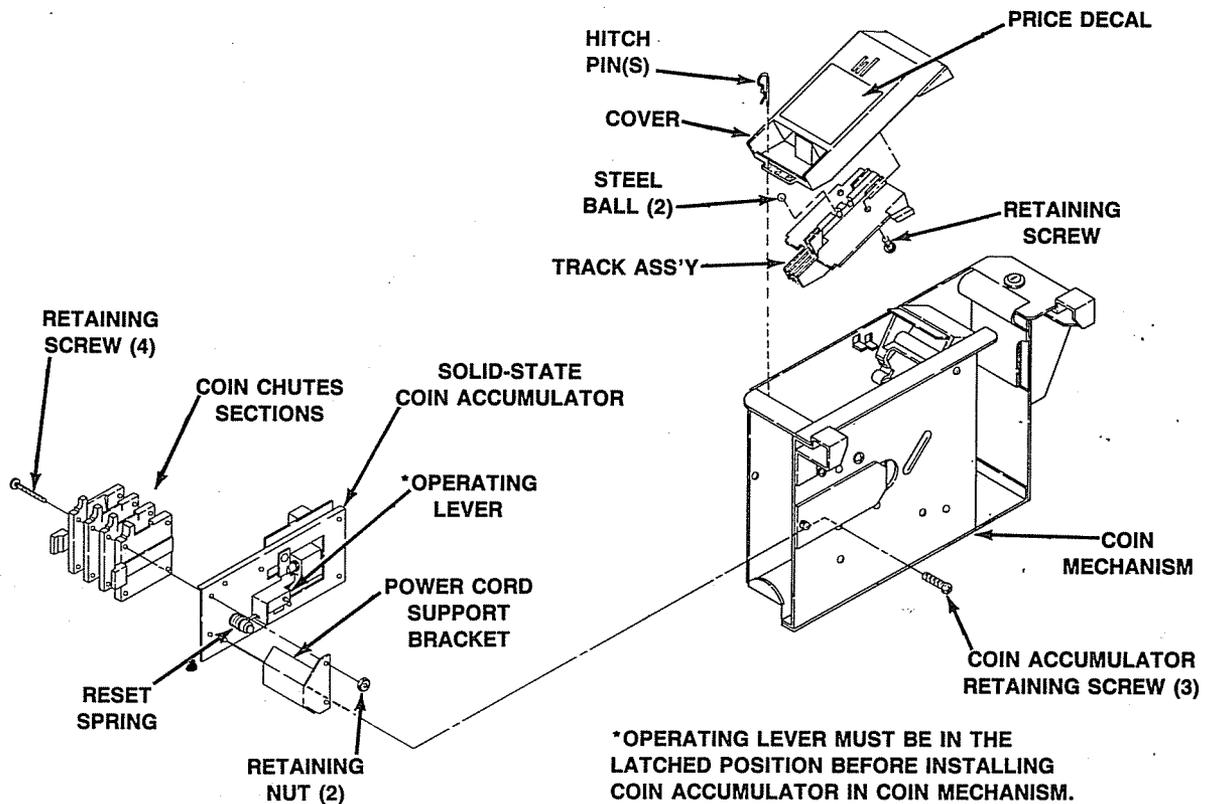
SOLID-STATE COIN MECHANISM PARTS IDENTIFICATION
